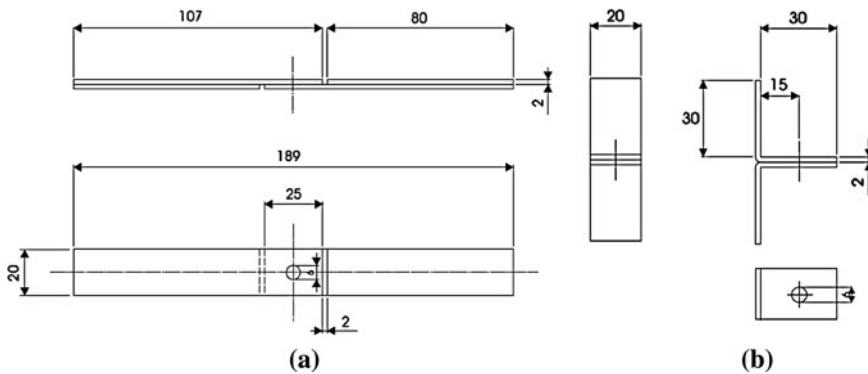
Geometry of tensile shear (a) and peel (b) joints. Dimensions in mm [5]
